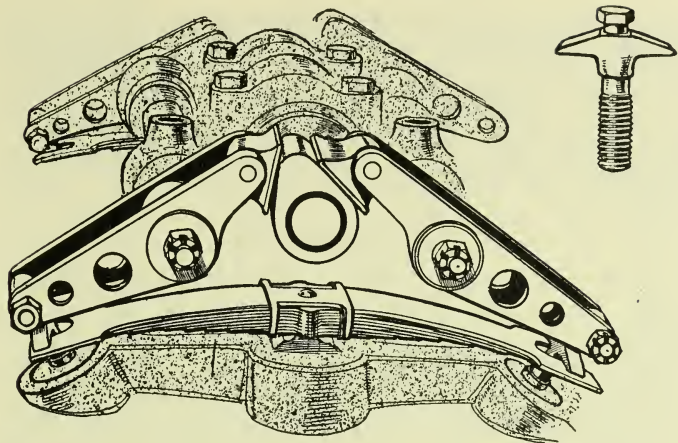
THE OVERHEAD CAMSHAFT GEAR OF THE LEYLAND EIGHT-CYLINDER-IN-LINE ENGINE
